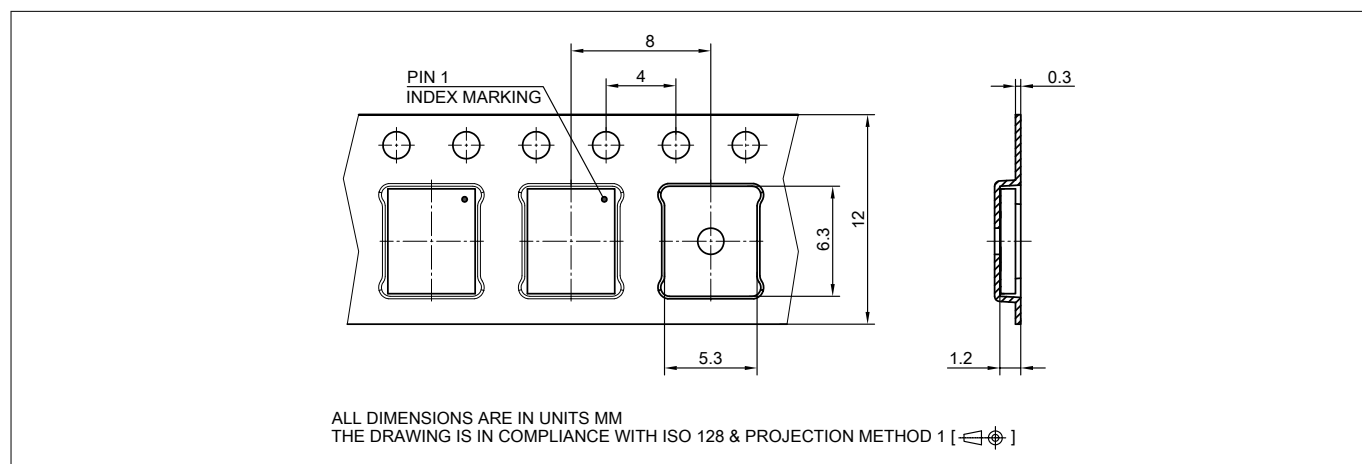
PG-VQFN-8-4, -6 tape & reel packing
